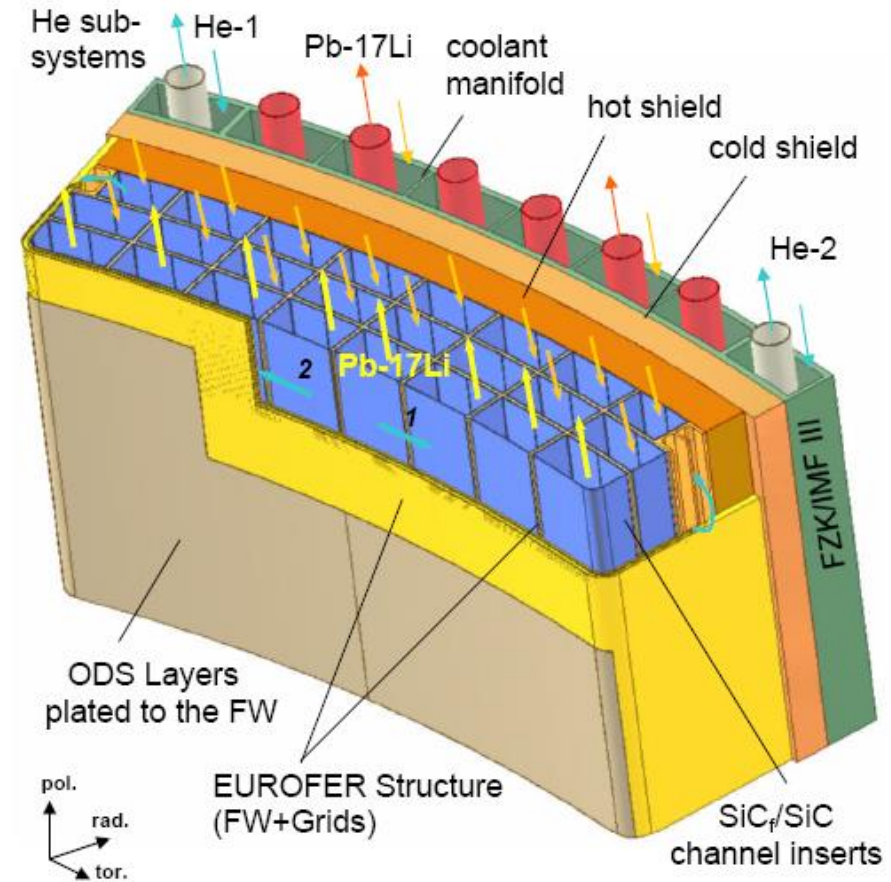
Dual-coolant blanket (model C), equatorial outboard blanket module (1.5 x
